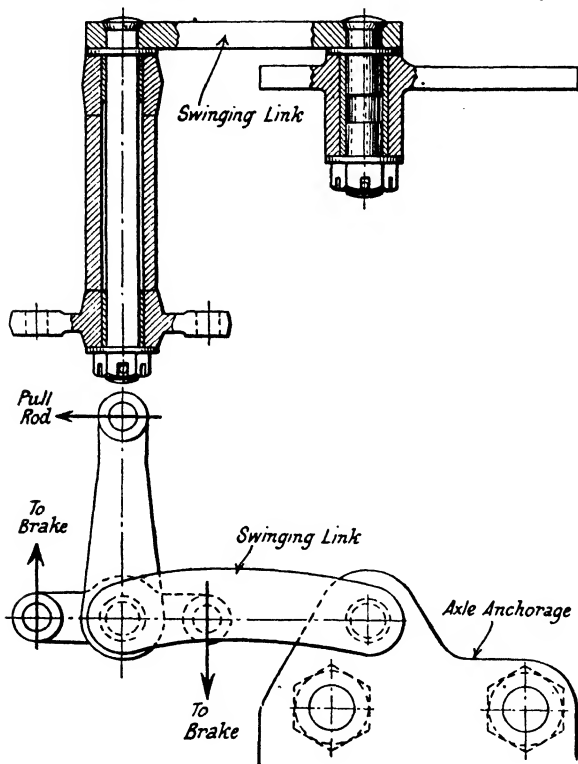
ONE FORM OF AXLE-MOUNTED COMPENSATOR, USED IN GIRLING BRAKING SYSTEMS, WHICH IS CARRIED BY A SWINGING LINK
